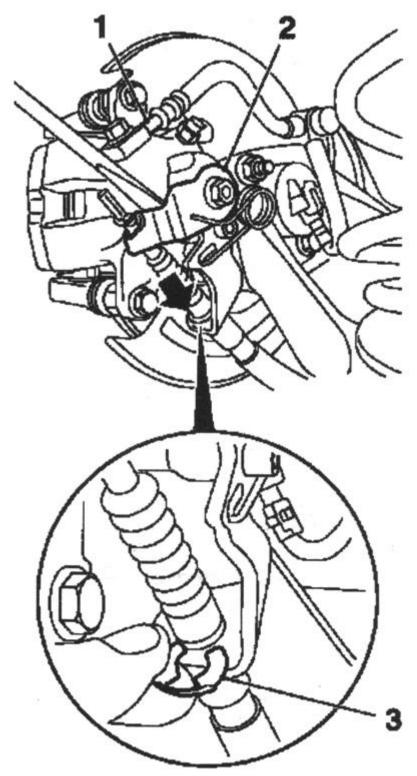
Withdrawal guide colo-DOS: 1 - brake hose, 2 - lever;
